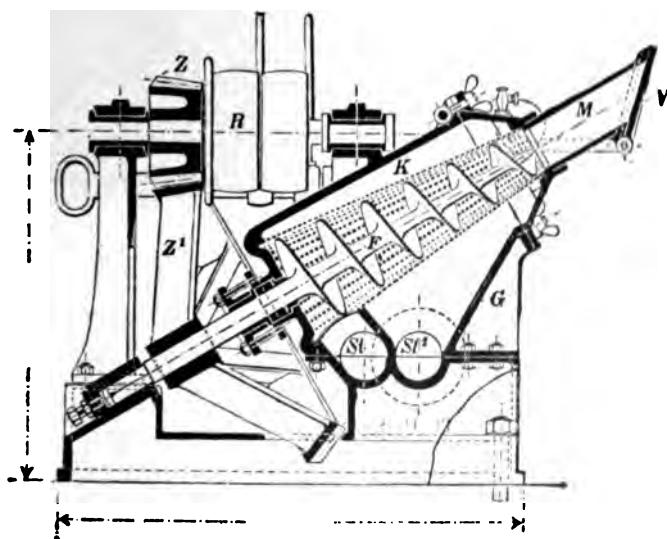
MÜLLER SPIRAL PRESS MASH CLEARING APPARATUS.
